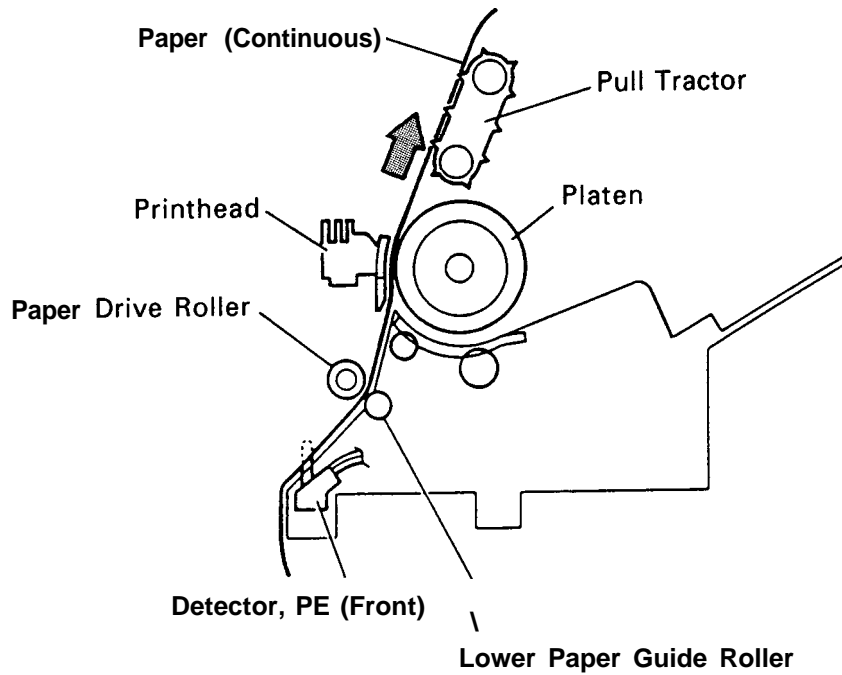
Paper Path for Pull Tractor Feeding Using the Bottom Entrance
